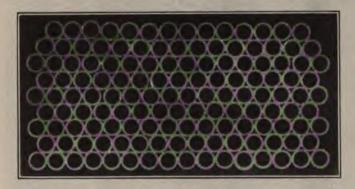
GUTTERING OF THE WIRES IN THE MACHINE TYPE OF WINDING
